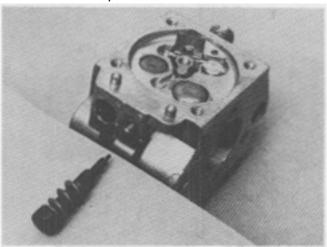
Remove needle valve. Check for wear or damage. Replace if necessary.
